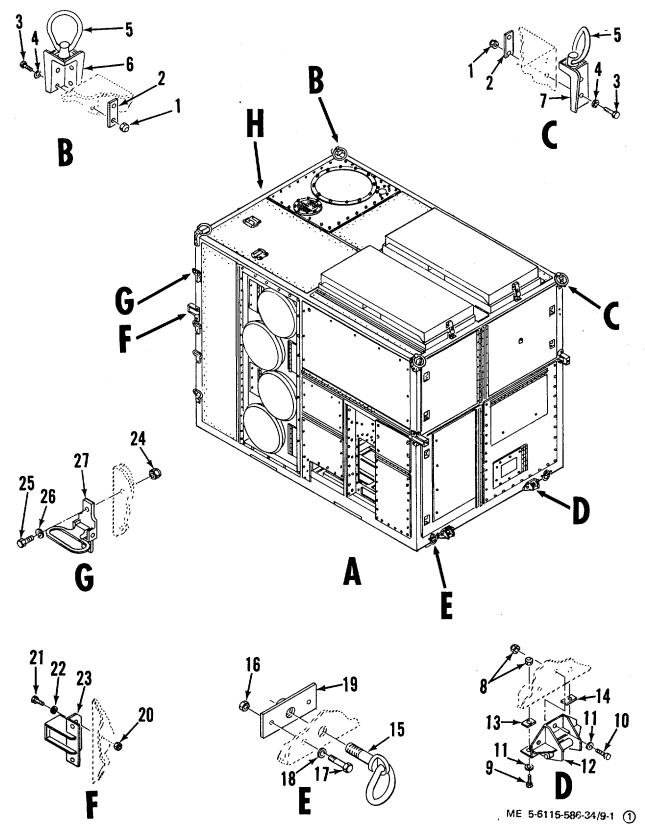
Enclosure assembly, exploded view. (sheet 1 of 10)
